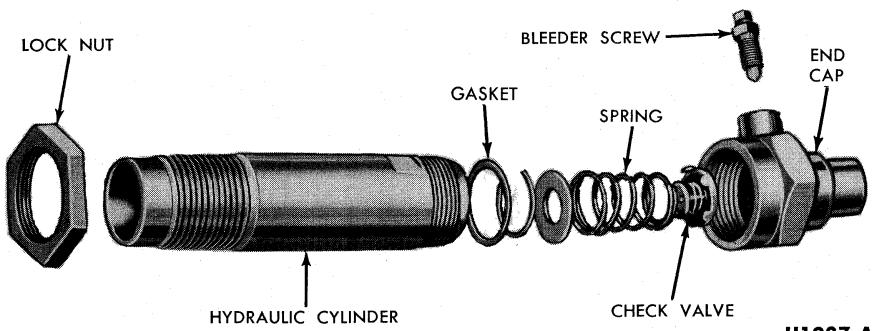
Hydraulic Cylinder, Check Valve and End Cap
